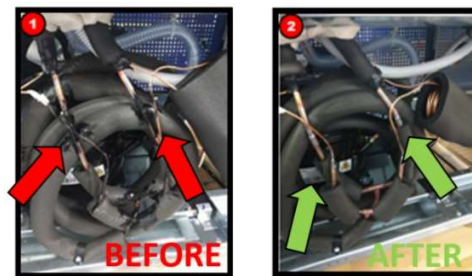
Painted and unpainted photos of copper pipe weld points
